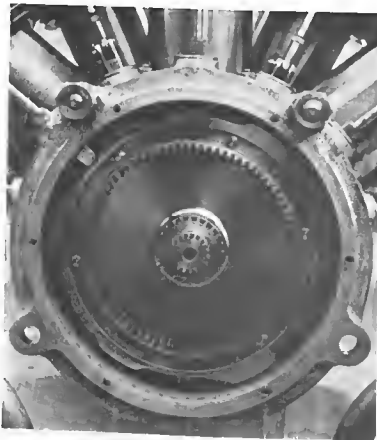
Esnault-Pelterie Seven-Cylinder Aero Engine. Forward End of Crankcase Is Removed, Showing the Single, Double-Faced Cam Operating all Valves.
